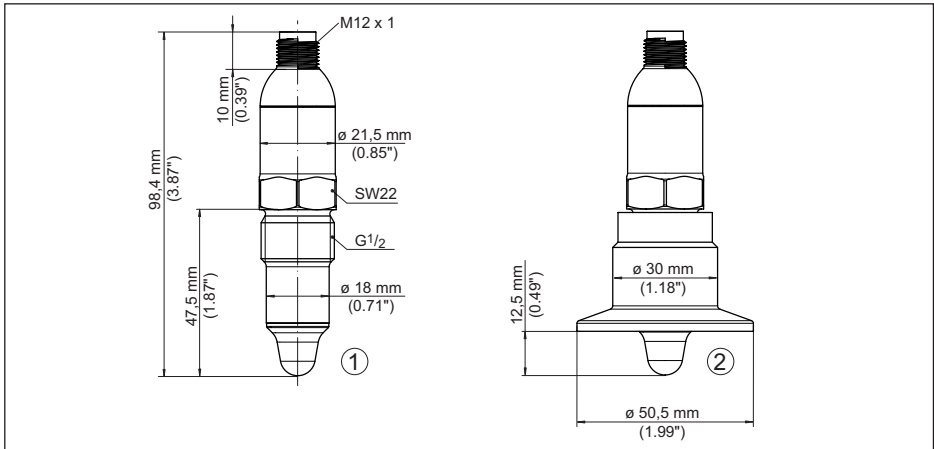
VEGAPOINT 11, hygienic version - Thread
